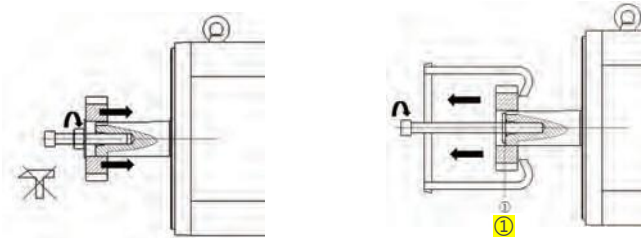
Installation and Disassembly of the Transmission Unit ①: Gasket (for protecting shaft extension alignment)
